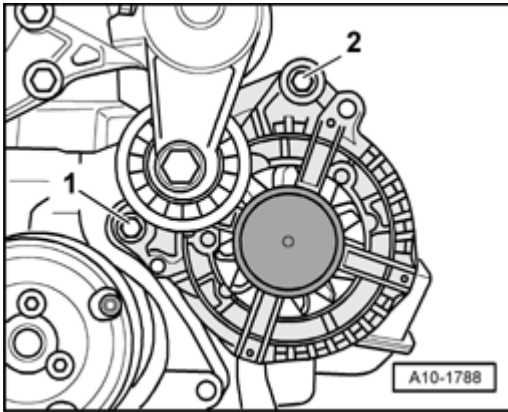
Removing Upper/Lower Securing Bolt For Generator
